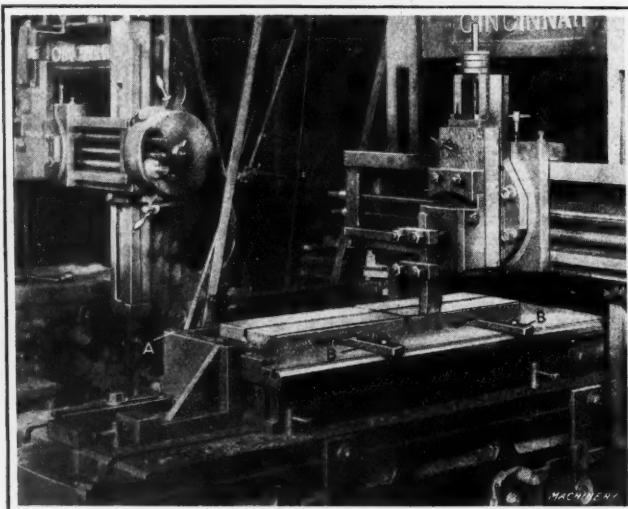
Use of Magnetic Chuck for holding Small Pieces of Planer Work
